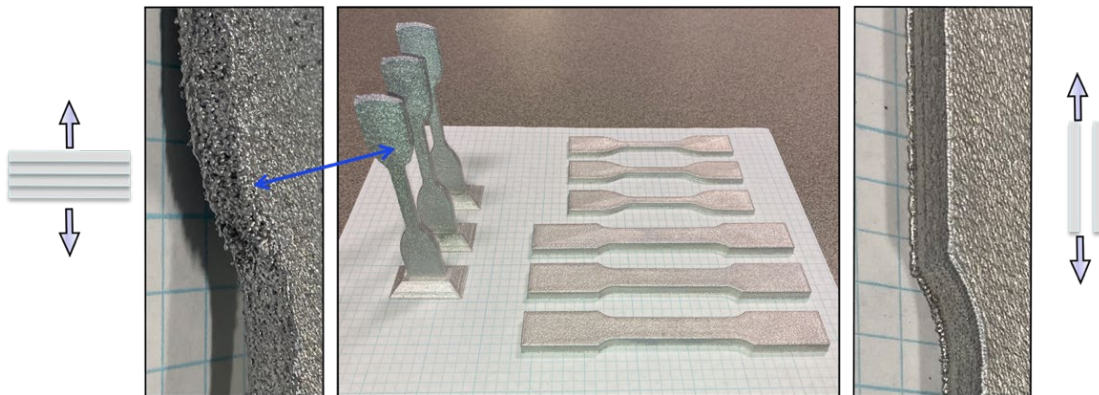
As-Printed Tensile Specimens: Visual Inspection
